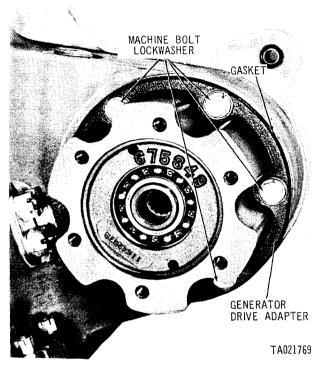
Removing or installing generator drive gear adapter and associated parts, model AVDS-1790-2C engine.
